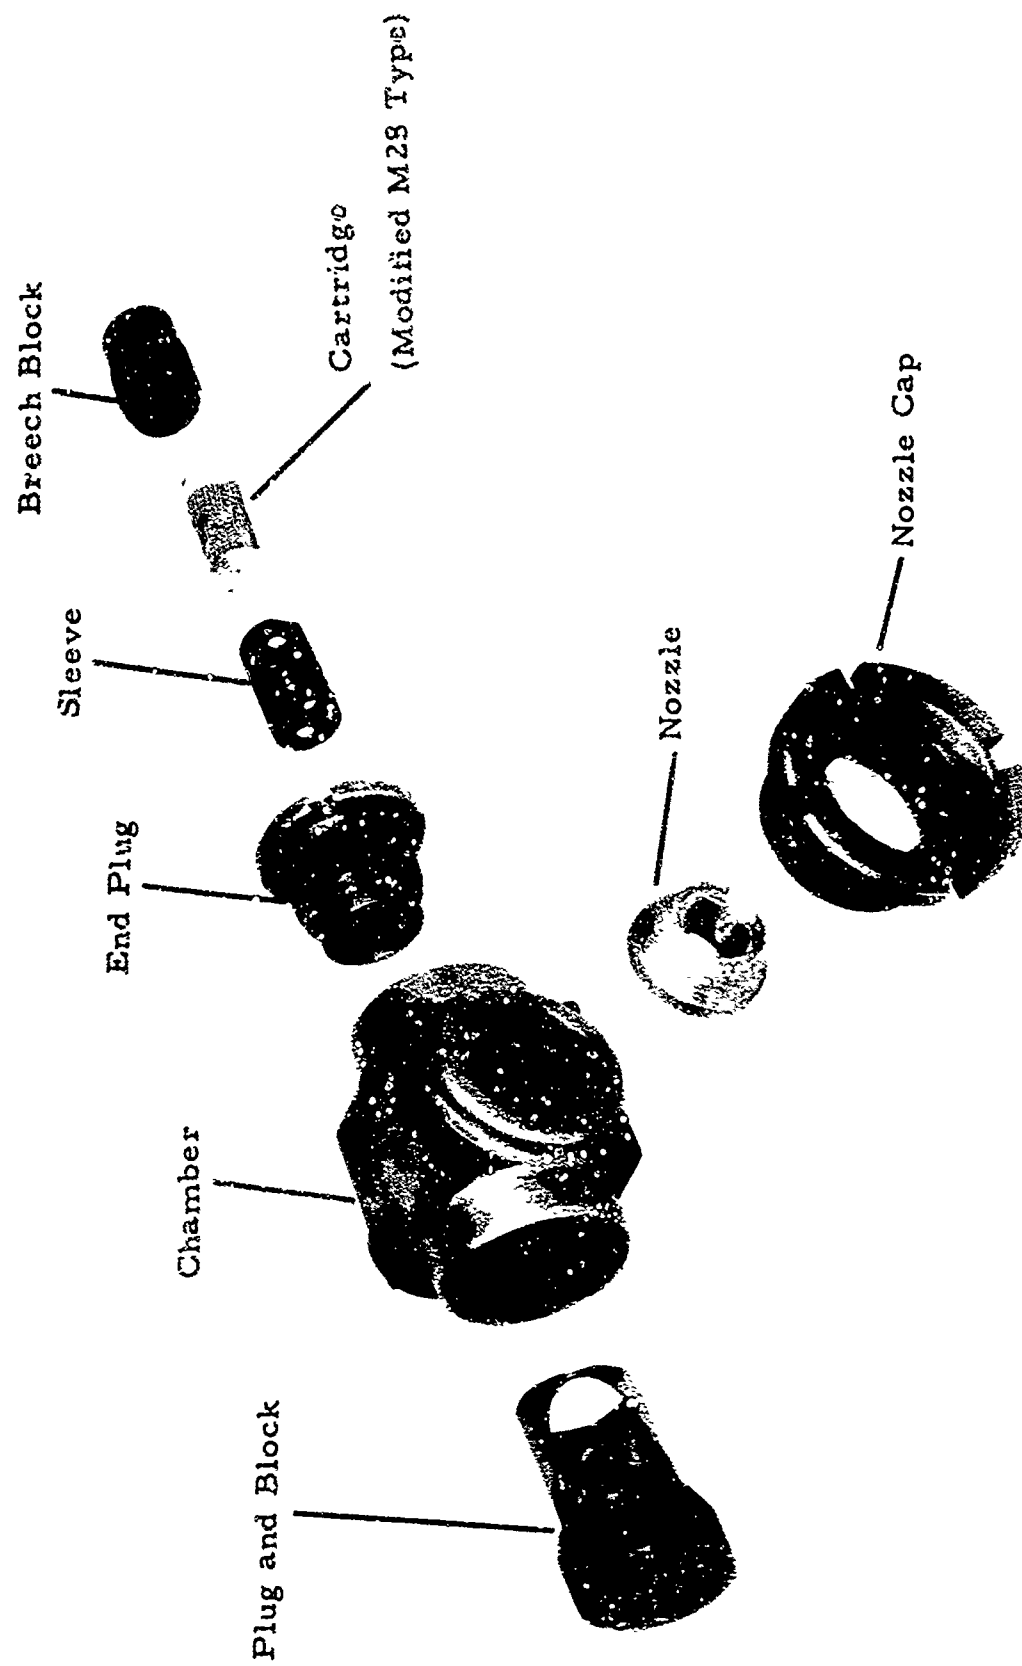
Test Fixture No. 2 - Exploded View
